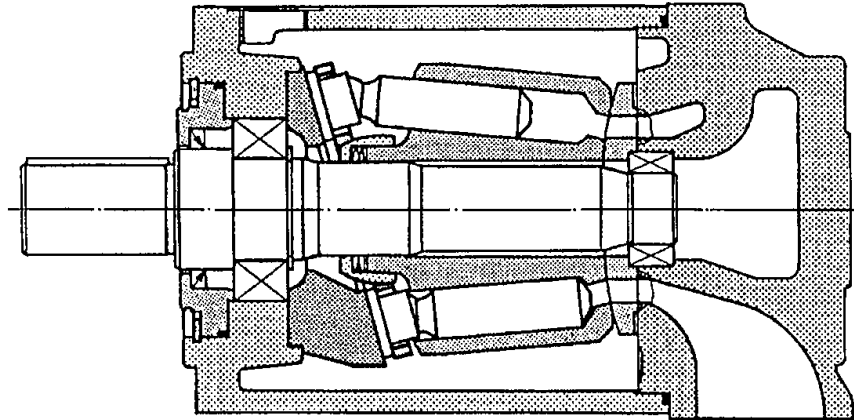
Axial piston swash plate pump (Bosch Rexroth).
